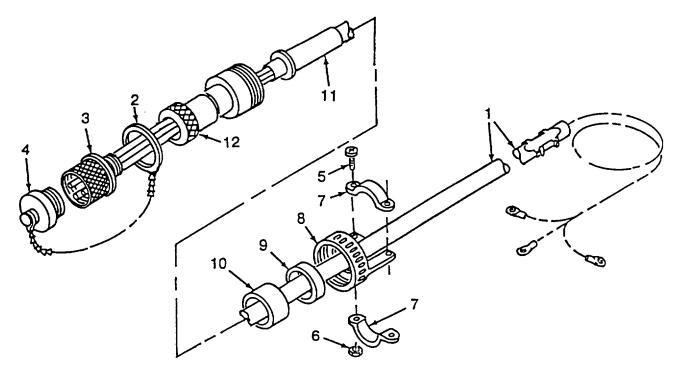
Remote Control Thermostat Repair (Sheet 3 of 3)
